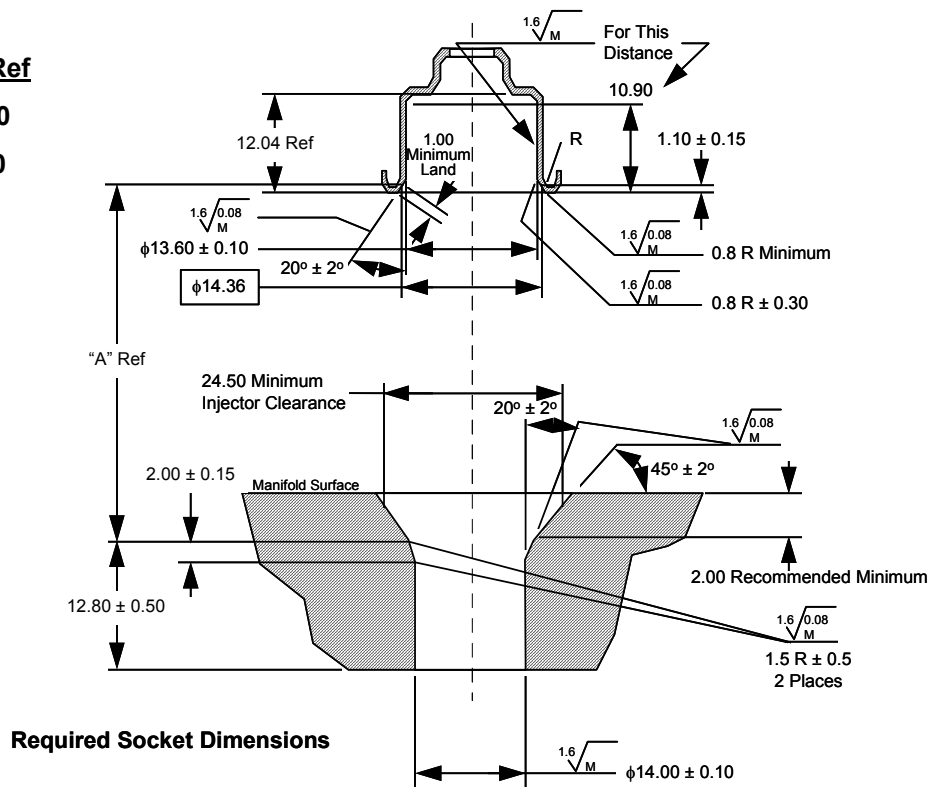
Example of Recommended Mounting Feature Dimensions
